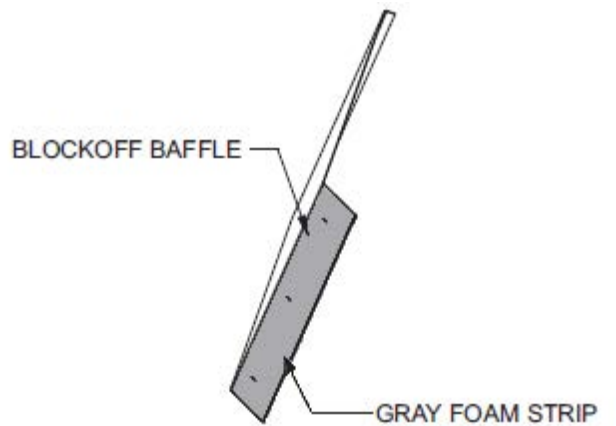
Adding Foam Strip to Block-Off Baffle
